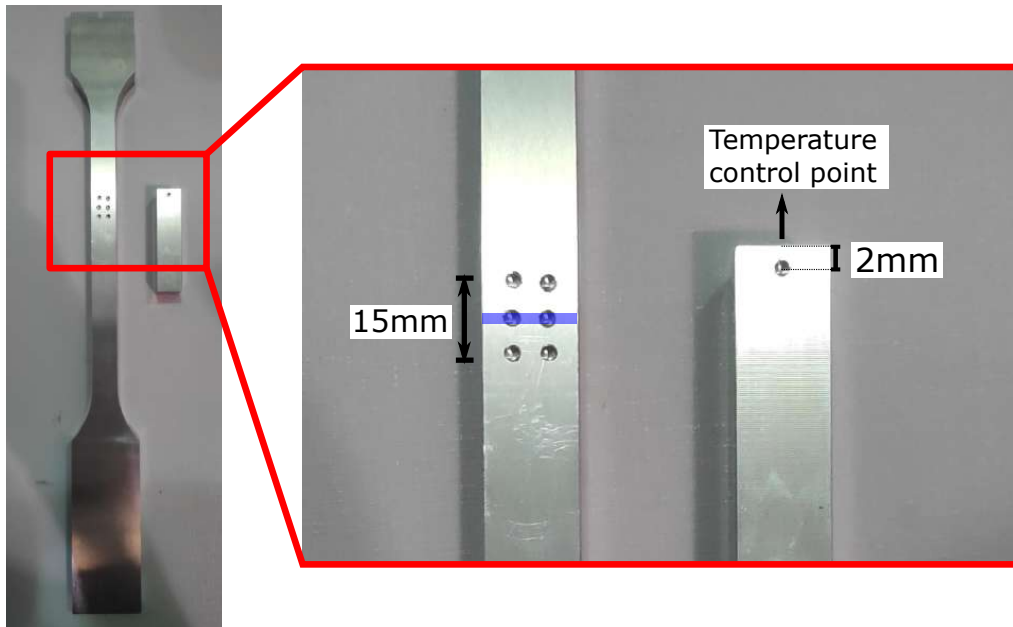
Fretting dummy specimen and contact pad with drilled holes where temperatures were measured. The faded blue rectangle illustrates the local where the contact would occur in a fretting test.
